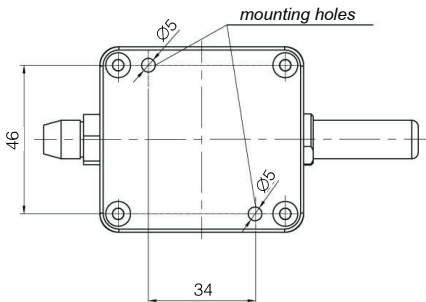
Lay-out of mounting holes of the P18(D) transducer
